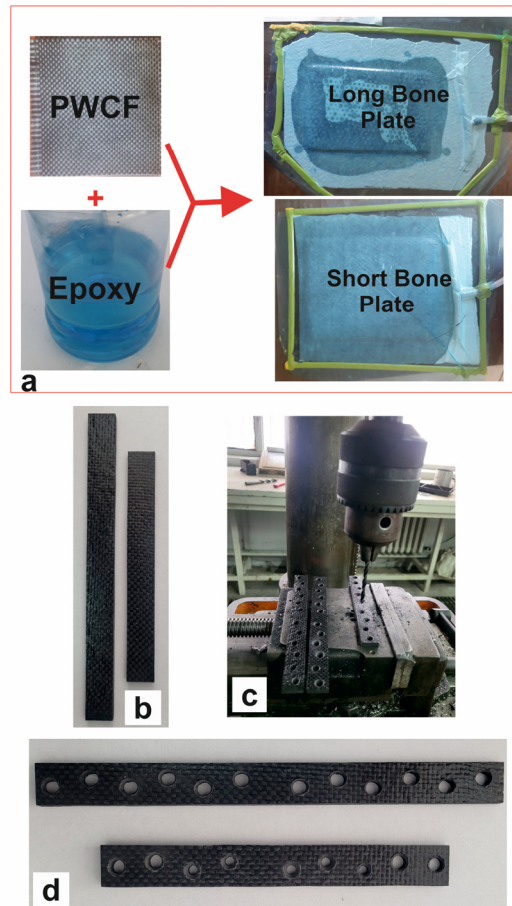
Production process of composite bone plates: a) vacuum production, b) plates cut to length and width, c) drilling of screw holes, d) finished bone plates
